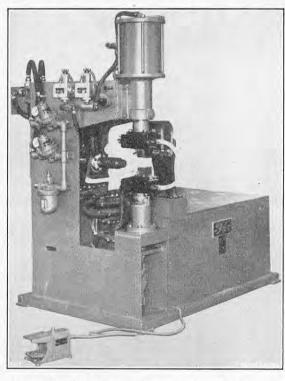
BOLT-BLANK HEATER; ASEA ELECTRIC.
